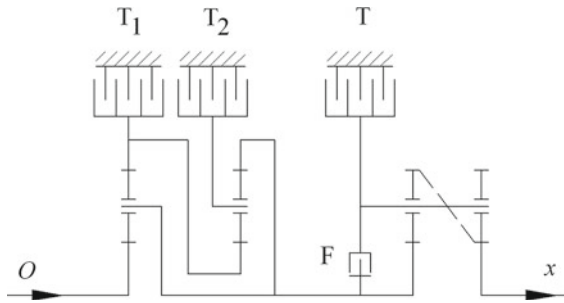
Double-step friction steering device with planetary reverse system kinematic diagram: O and x —input and output shafts respectively; T_1 and T_2 —first and second step brakes: T and F —reverse brake and clutch
